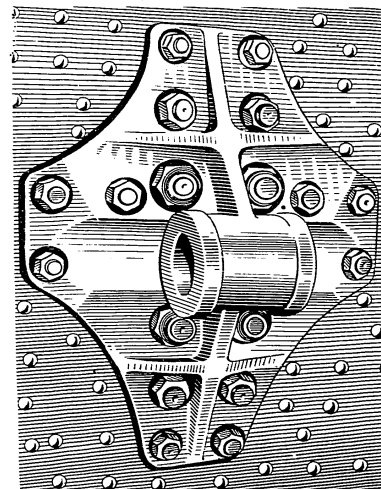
L.G. AXLE SHAFT ATTACHMENT UNIT ON FRAME NO.18.
